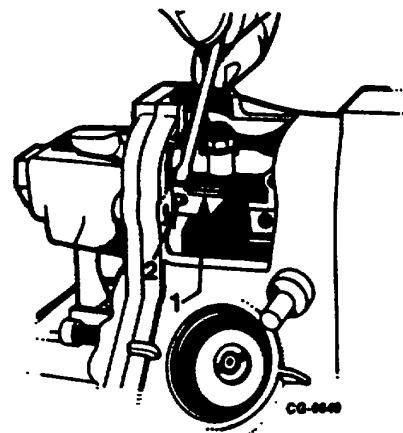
Disengaging Stop Shackle (Cut-Away View for Illustration)
